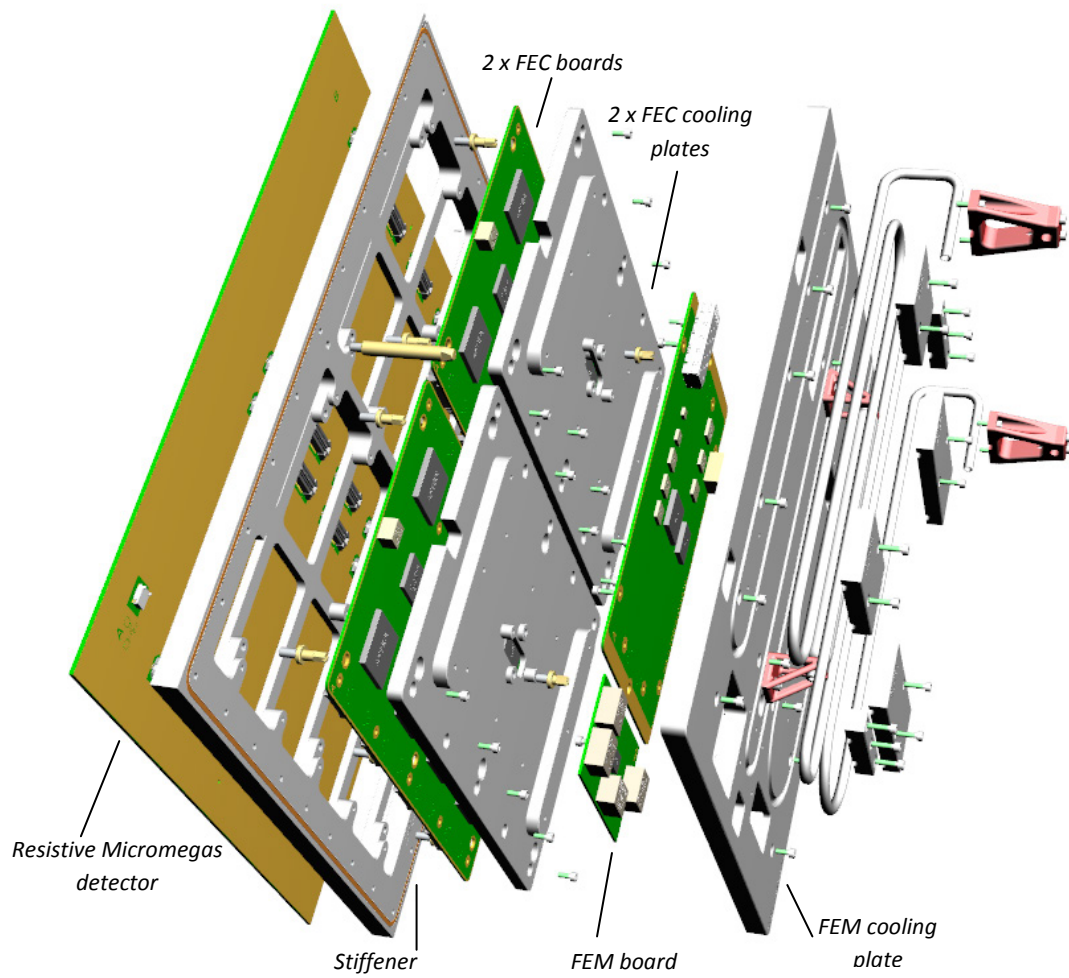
Preliminary drawing for the assembly of a detection module : 1 resistive Micromegas detector, 1 stiffener, 2 FEC boards, 1 FEM board, their shielding/cooling plates.
